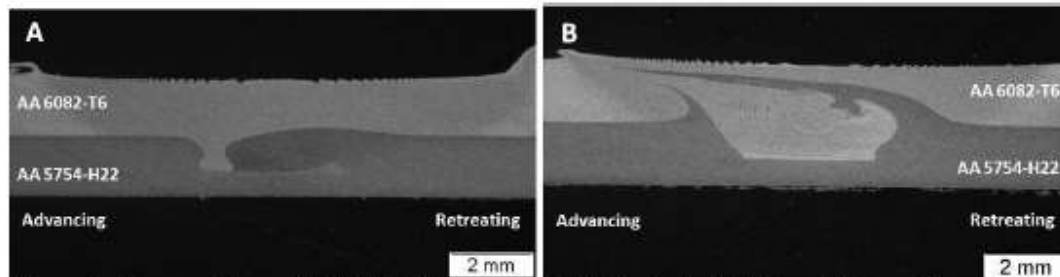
Cross-sections of AA6082-T6/AA5754-H22 dissimilar FSW lap joints performed with (A) a non-threaded - 2,5 mm long probe tool at 1500 rpm – 150 mm/min; and (B) a threaded - 2,5 mm long probe tool at 1500 rpm – 150 mm/min.
